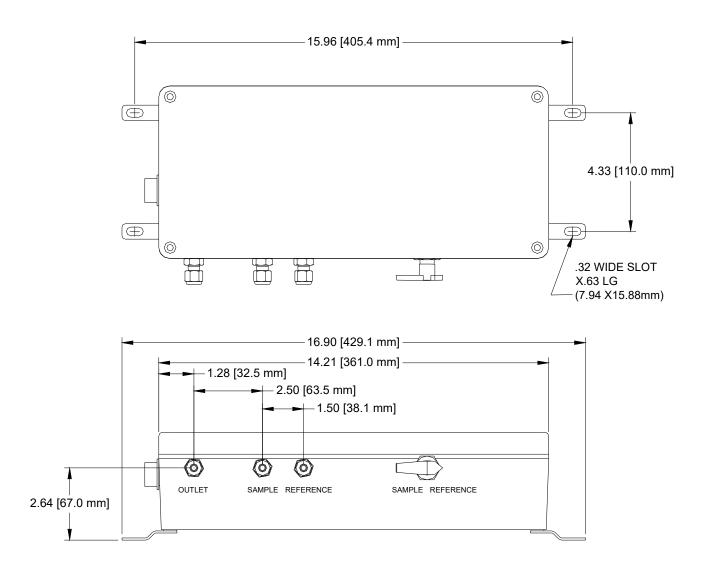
dFFOZ-TR, Dimensions and Mounting Hole Pattern
